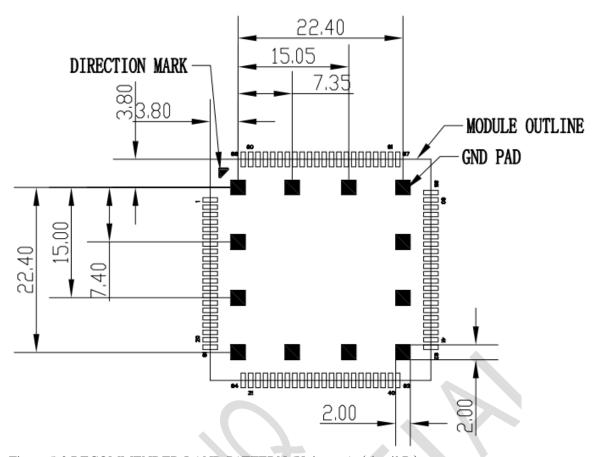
RECOMMENDED LAND PATTERN (Unit: mm) (detail B)
